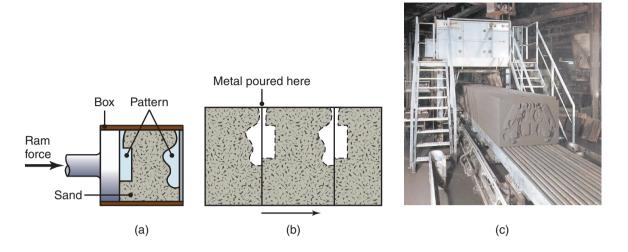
Vertical flaskless molding. (a) Sand is squeezed between two halves of the pattern. (b) Assembled molds pass along an assembly line for pouring. (c) A photograph of a vertical flaskless molding line. *Source:* Courtesy of American Foundry Society.
